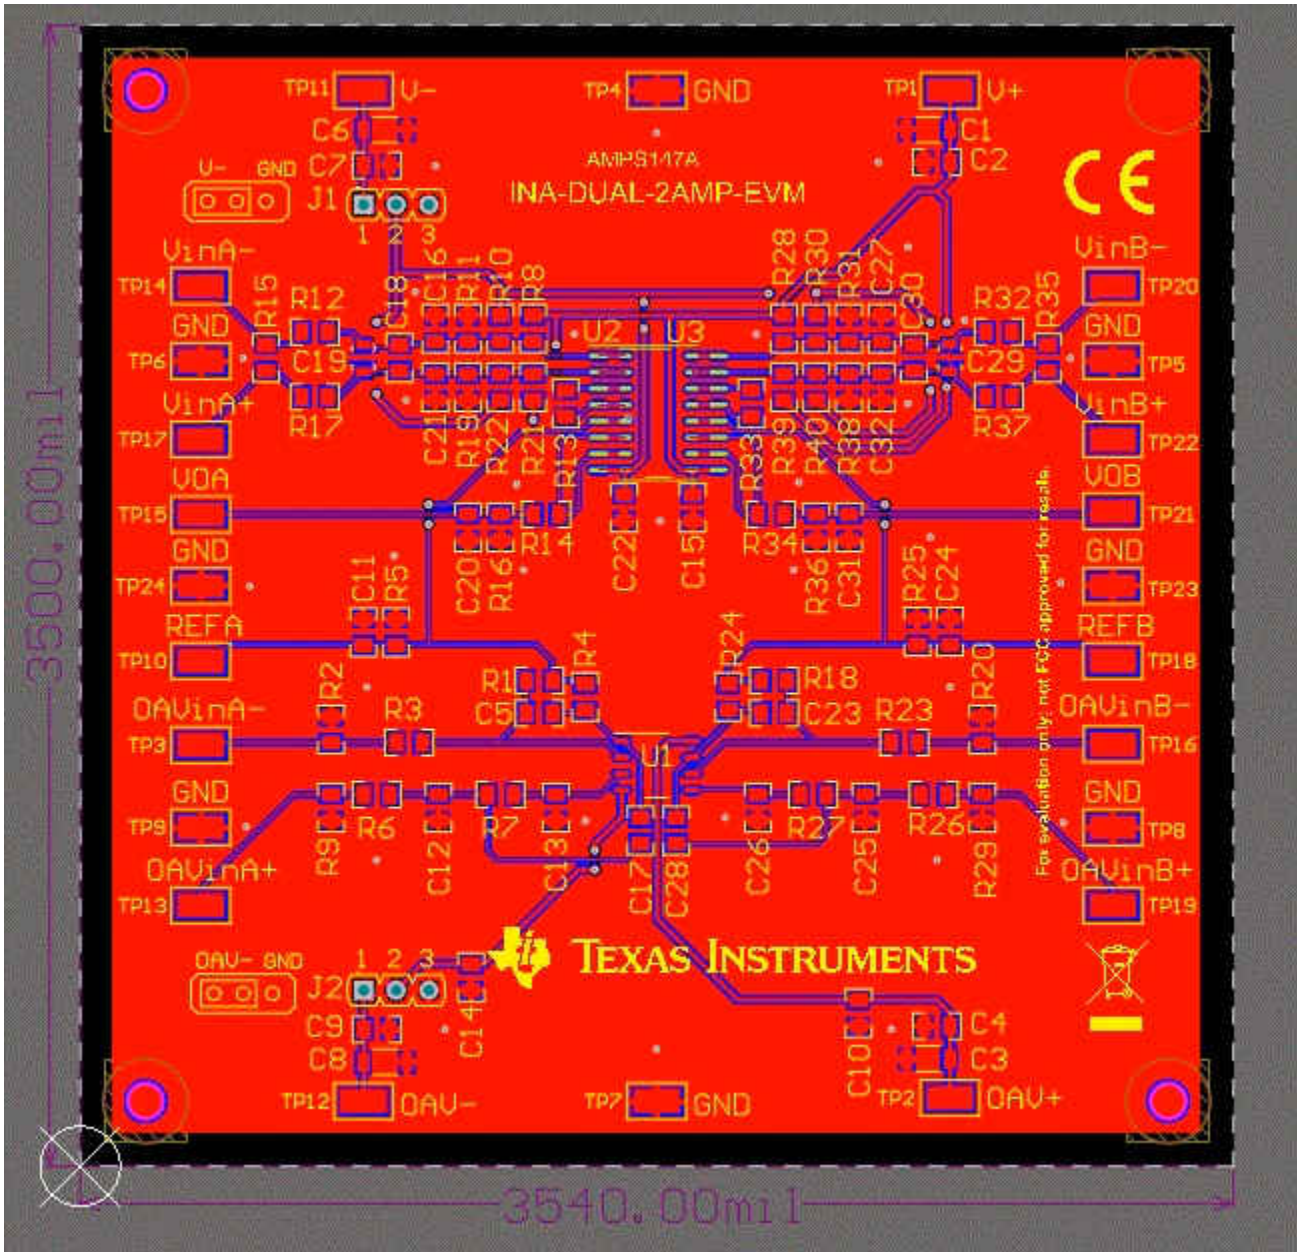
INA-DUAL-2AMP-EVM PCB
